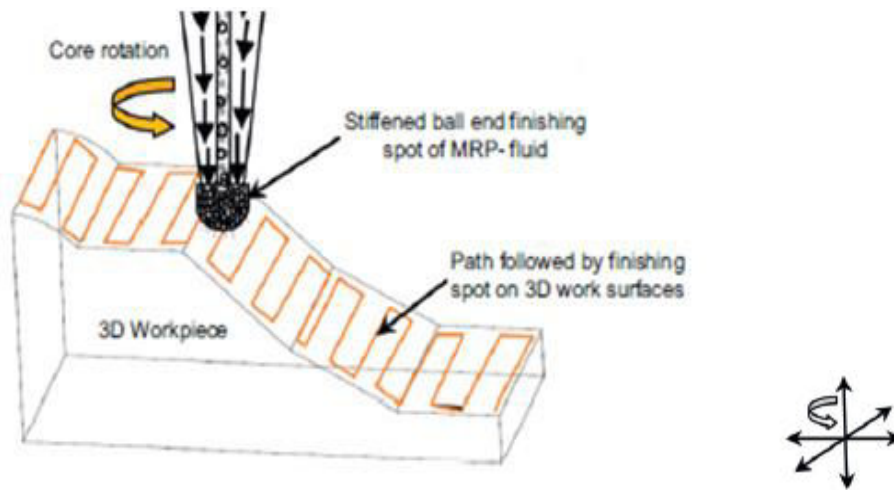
Schematic of a ball end MR finishing process of the typical 3D workpiece surfaces [Singh et al., 2012]
